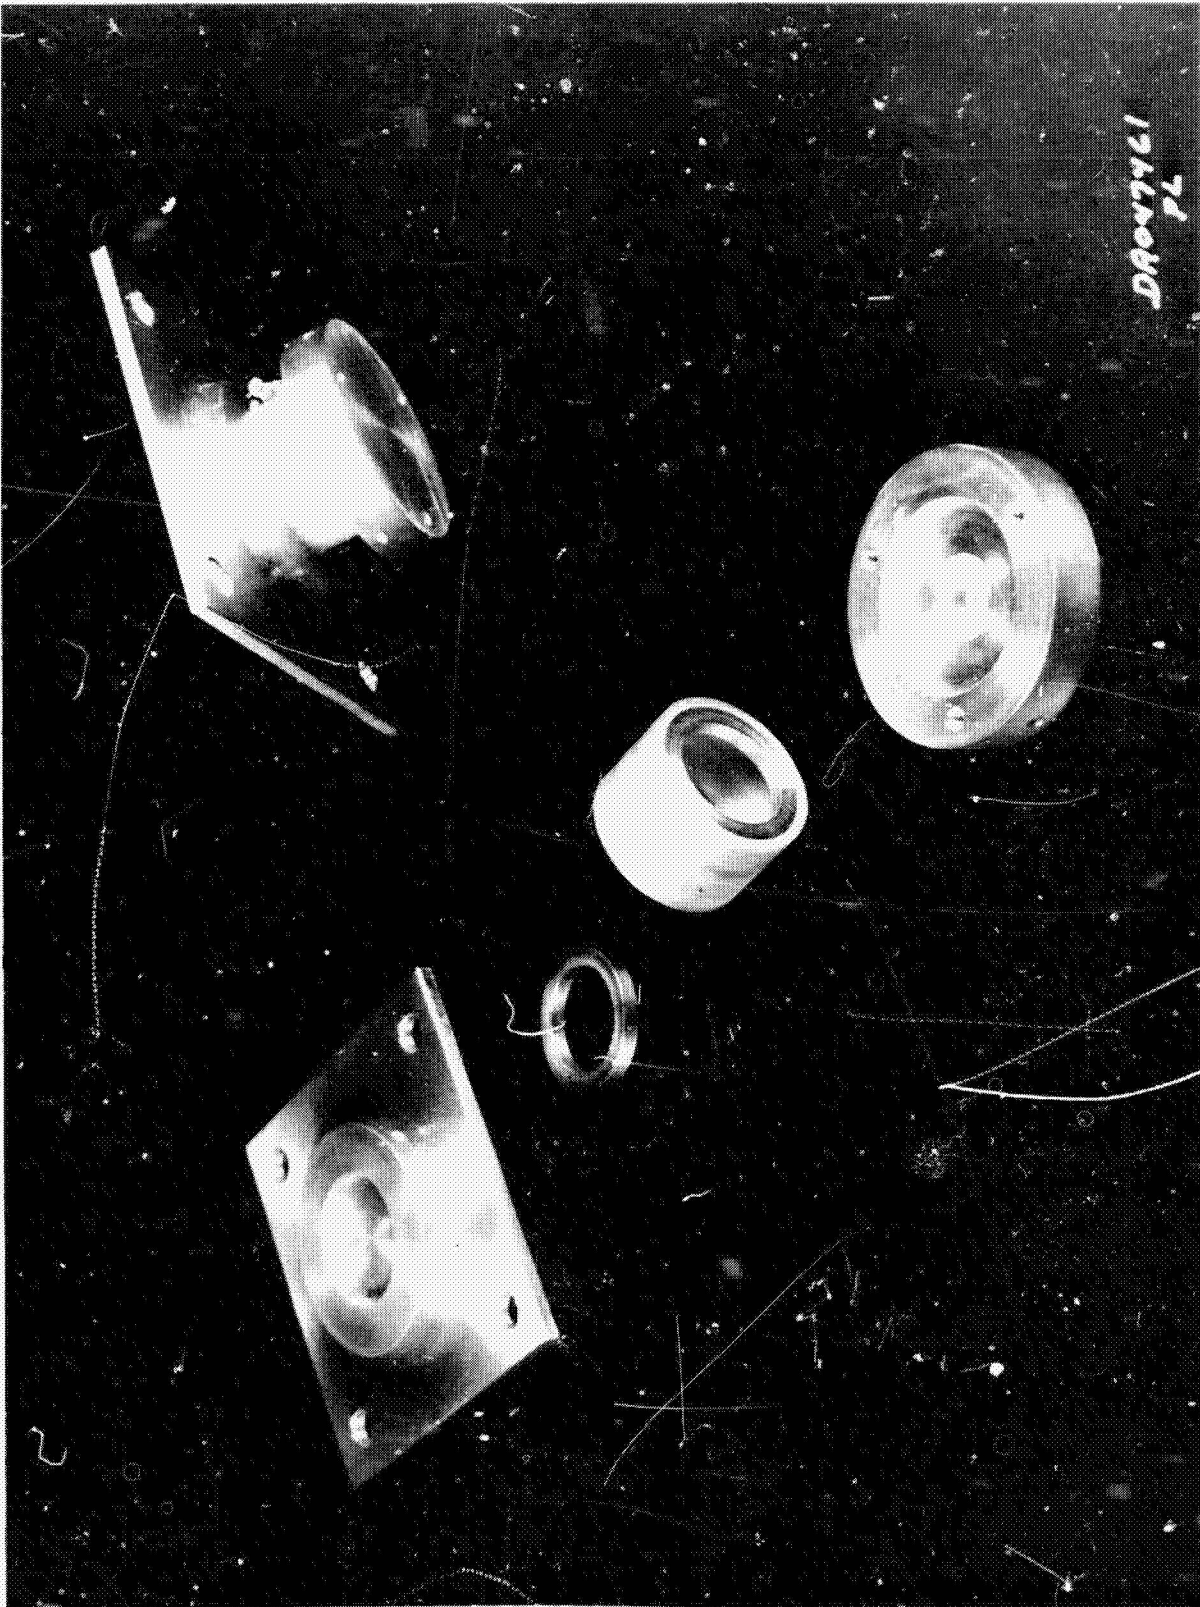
Assembly of Tube Section Thermal Conductivity Specimen
